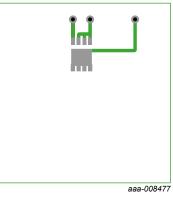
PCB layout for thermal resistance junction to ambient minimum footprint; FR4 Board; 2oz copper
